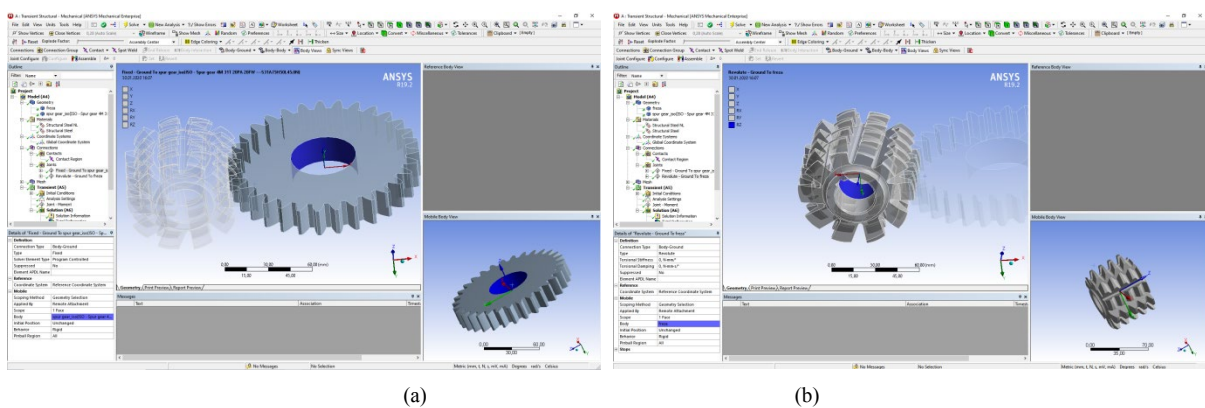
(a) Defining of the kinematic joints of the spur gear, and (b) joint of the hob gear cutter
